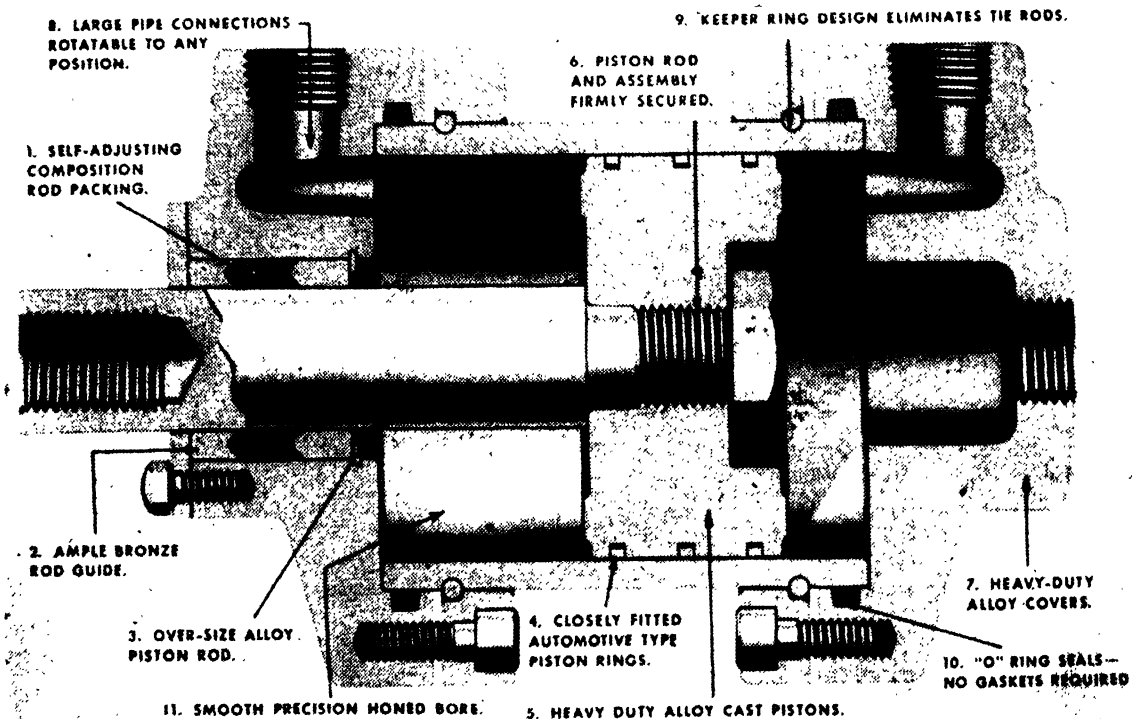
Double-acting cylinder. (Gerotor May Corp., Baltimore, Md.)
